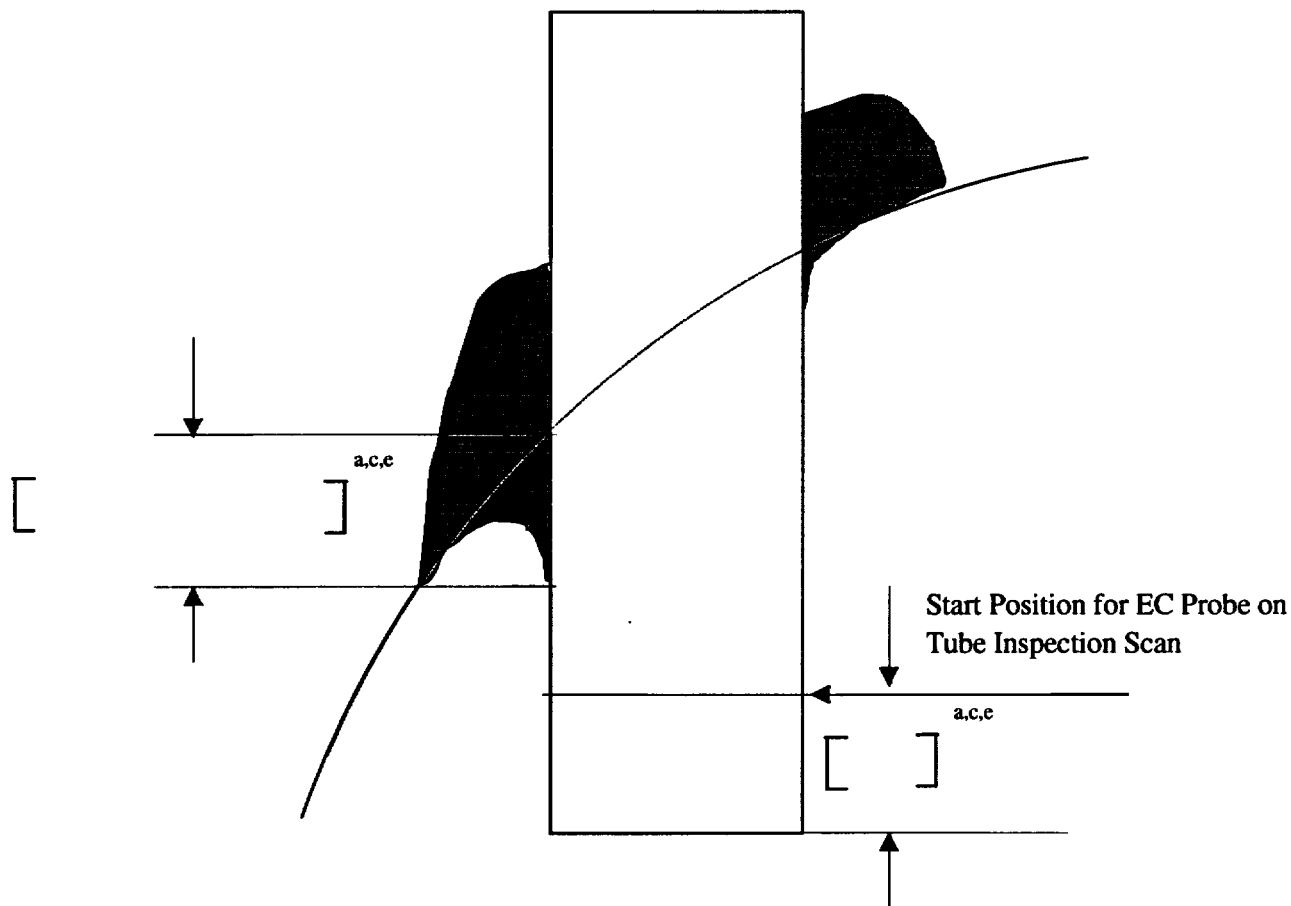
Layout for Surface Inspection Coverage for CRDM Tube OD Surface
